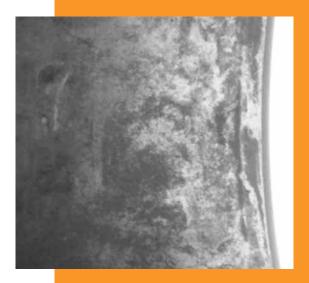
Classic fretting corrosion from poor fitting practice is depicted here. Relative movement unde load between the bearing and its seat caused this worn and corroded condition.
